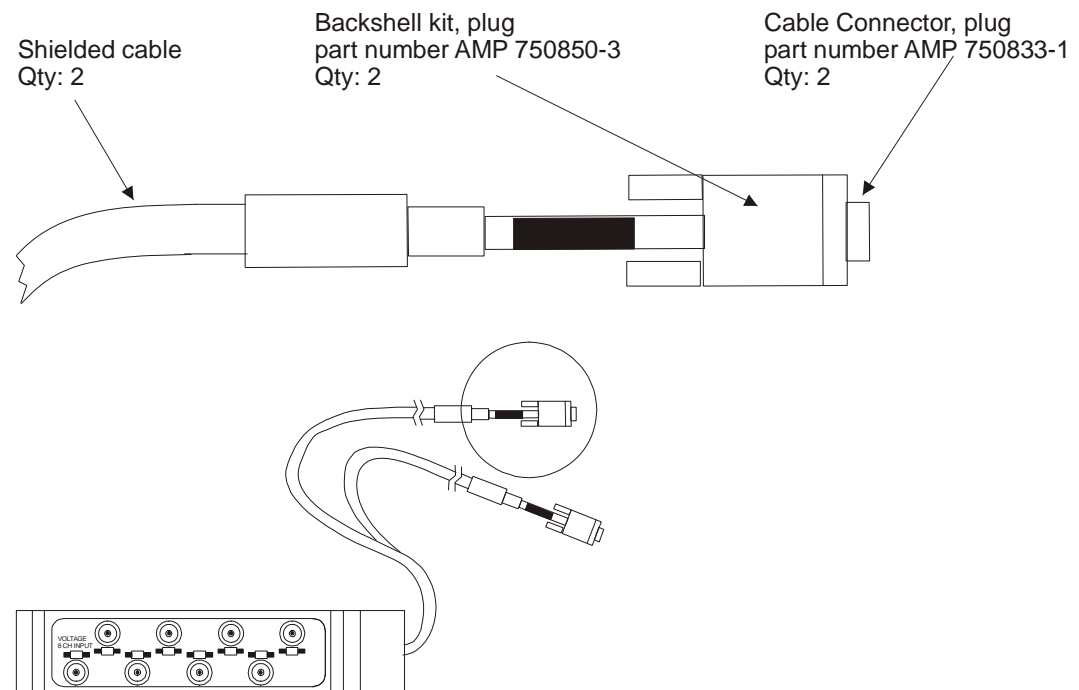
BREAKOUT BOX CABLE AND PART NUMBERS
